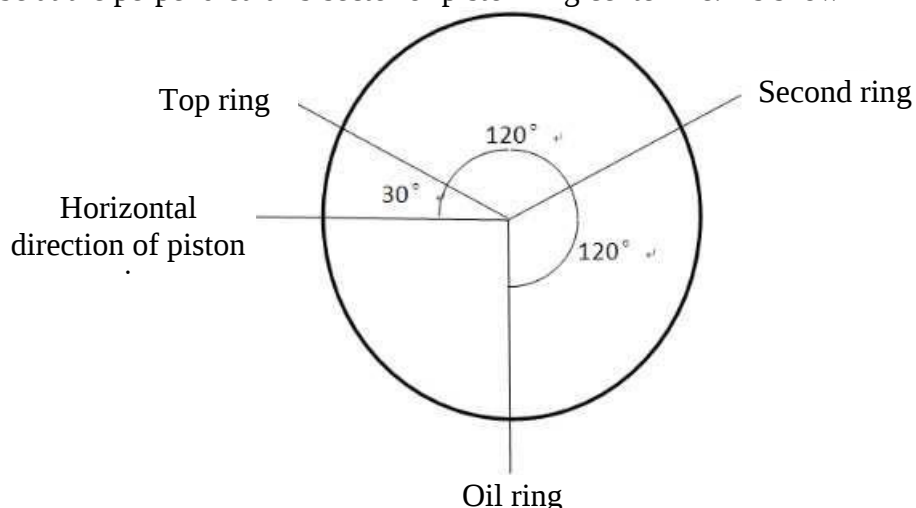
Schematic Diagram for Opening Angle of Piston Ring Assembly
